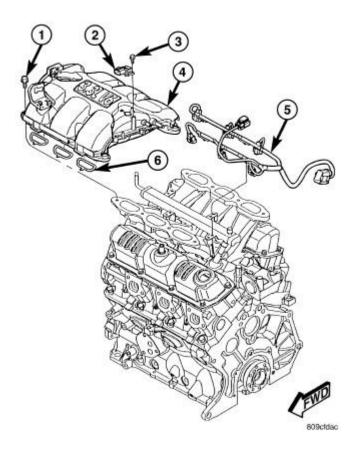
Identifying Upper Intake Manifold Courtesy of CHRYSLER LLC
